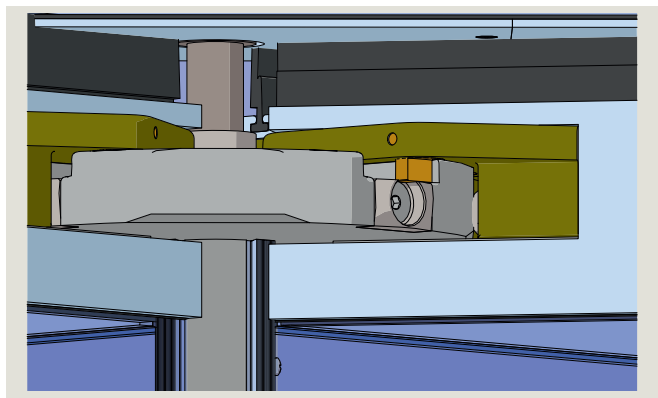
4 wing door center shaft top hangers and hanger disc; wing partially boofolded
